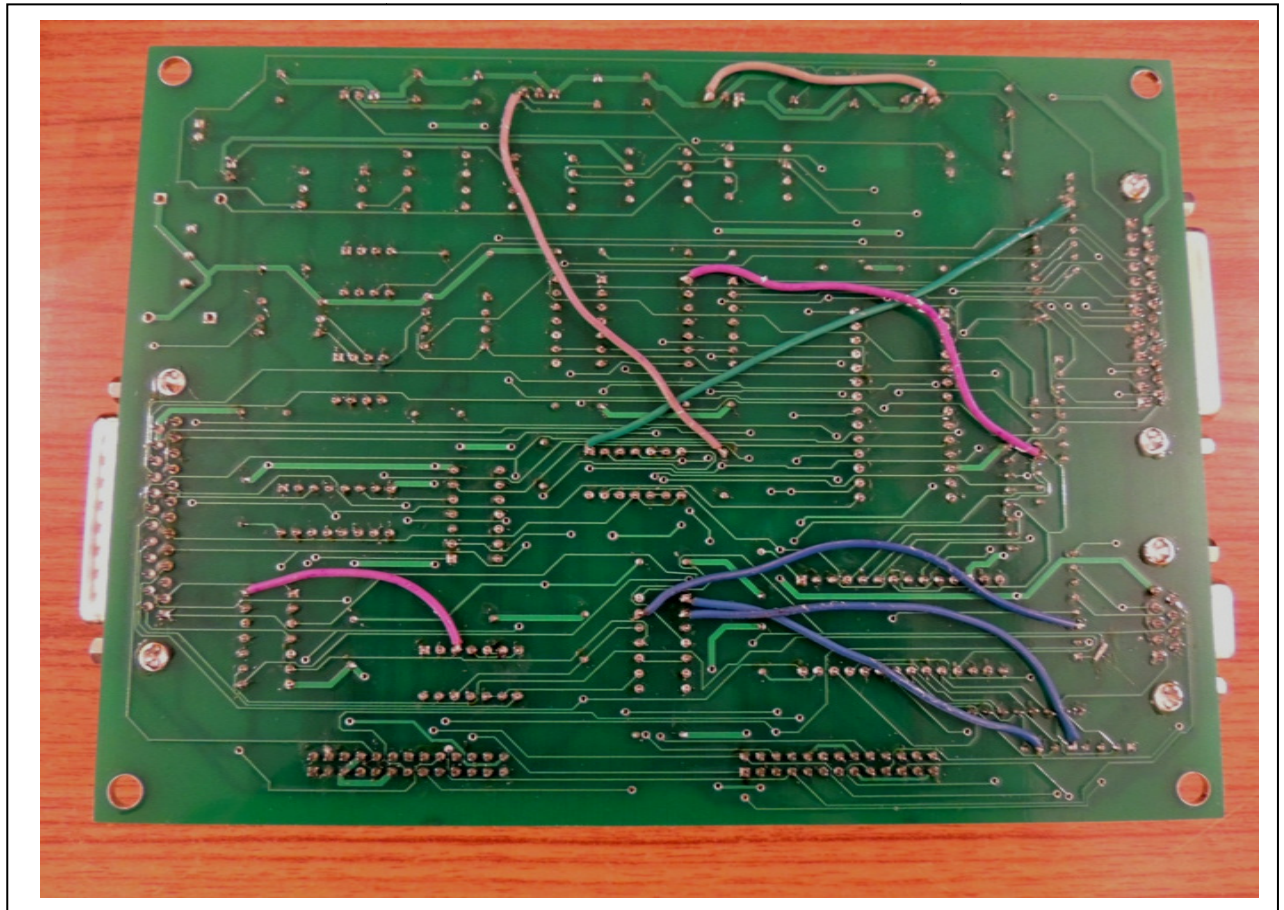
(b) Assembled RFCM card Ver.1 Bottom View.
